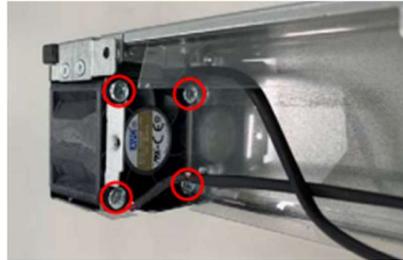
Remove fan from the bottom chassis by hand-pulling upwardly
